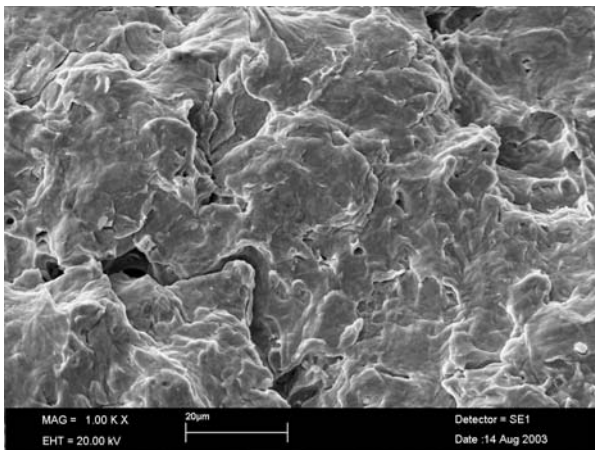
SEM fractograph of the sample welded at 1800 rpm.
